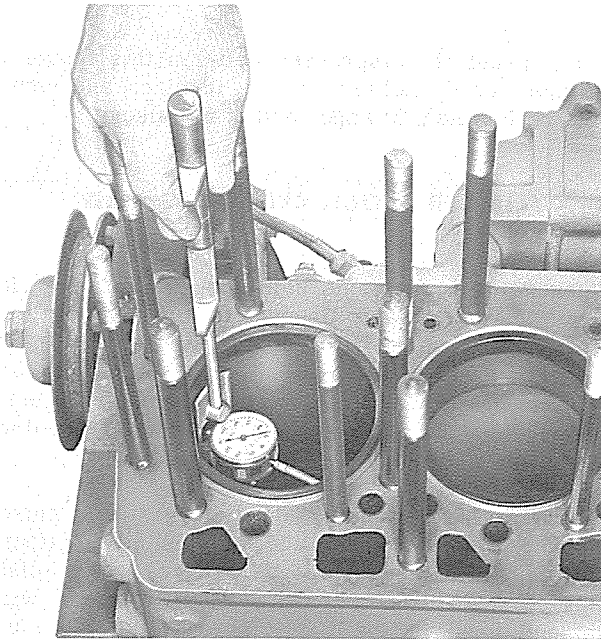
Checking Cylinder Sleeve for Roundness (T-20224)
